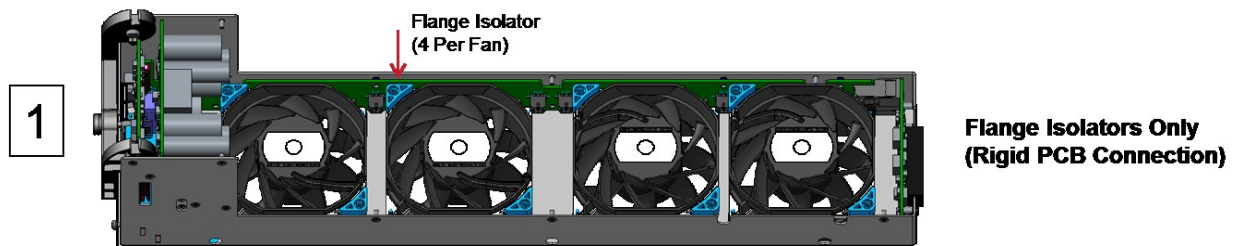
GEN2A with AHBM Test Case #1: Flange Isolators (Rigid PCB)
